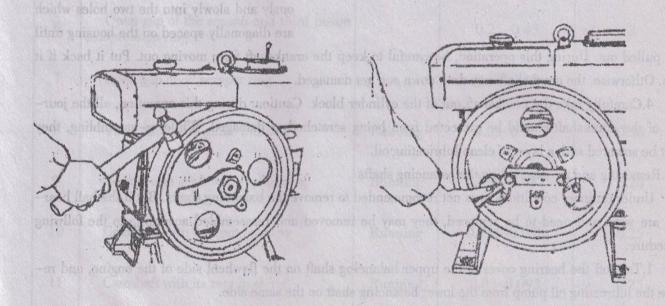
Loosening the flywheel nut by knocking the handle of the wrench with a hammer
